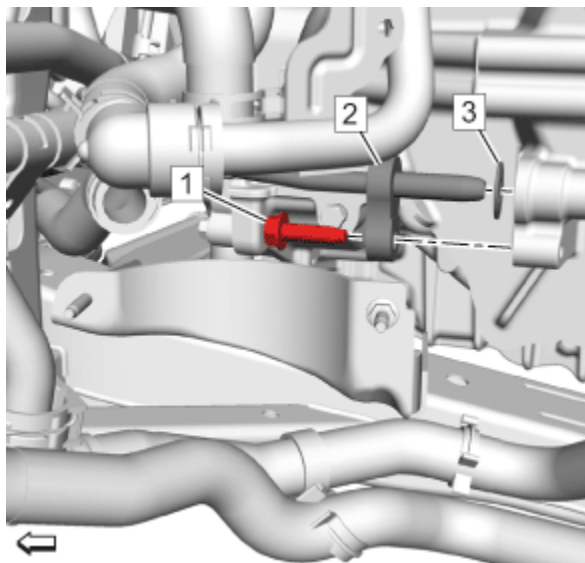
Transmission Fluid Cooler Outlet Pipe, Bolt And Sealing Washer
